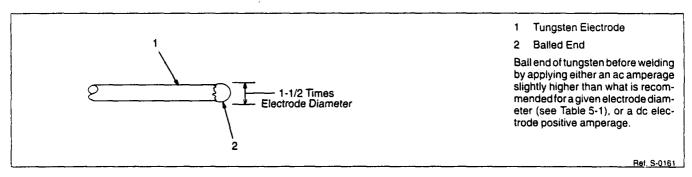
Preparing Tungsten For AC Or DC Electrode Positive (DCEP) Welding
